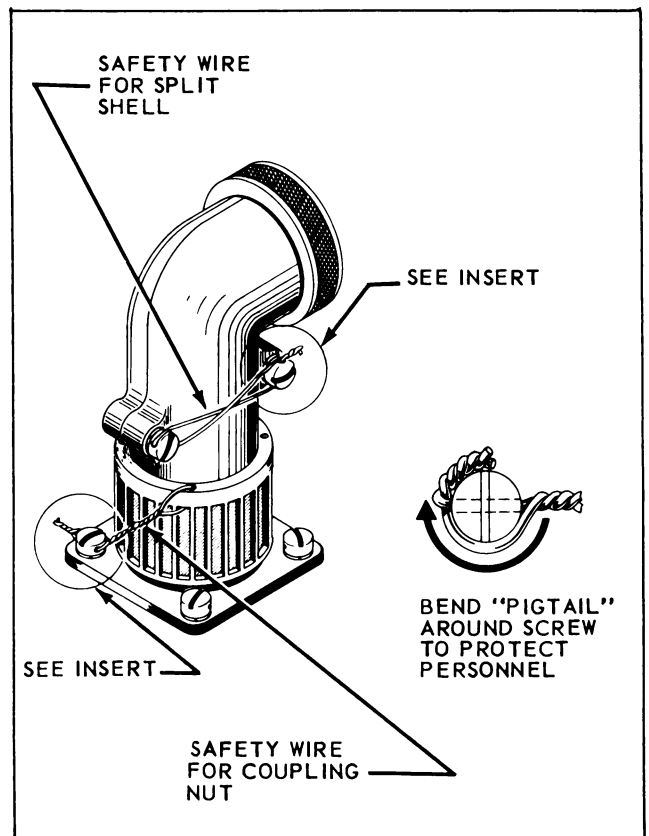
Safety Wiring "AN" Split Shell Assembly Screws
